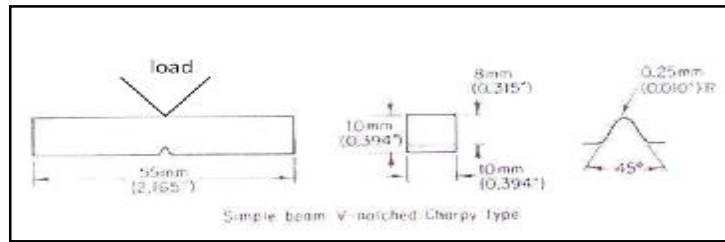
The Charpy V-notch impact specimen Dimensions [9]
